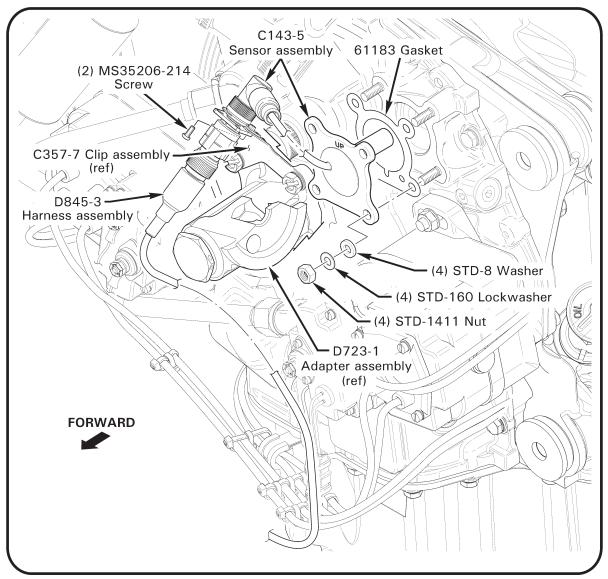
Location of sensor & bracket (view looking aft; oil filter removed for clarity)
